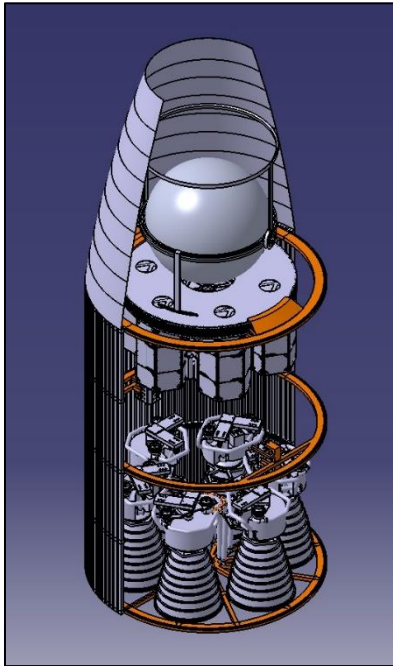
Fixtures for VASIMR on Top, Fixtures for the RCS in the Middle, and the Fixtures for RS-25 at the Bottom
